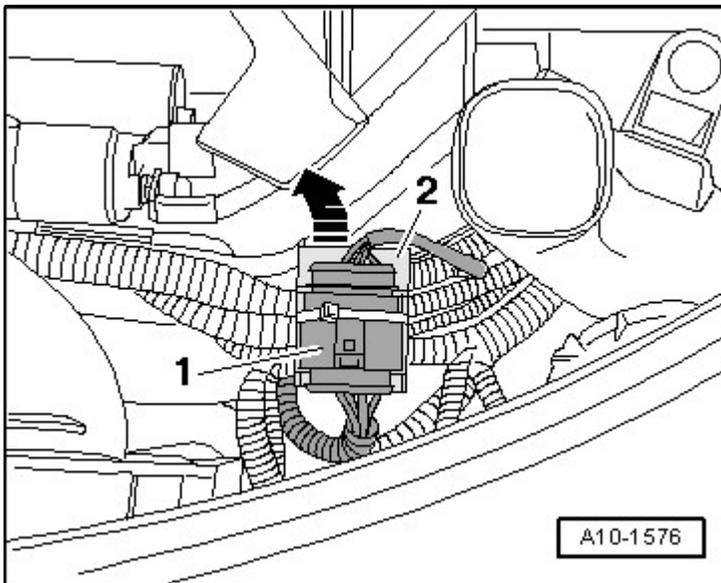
Identifying Electrical Connector -1- And Wiring Guide Bracket -2-
